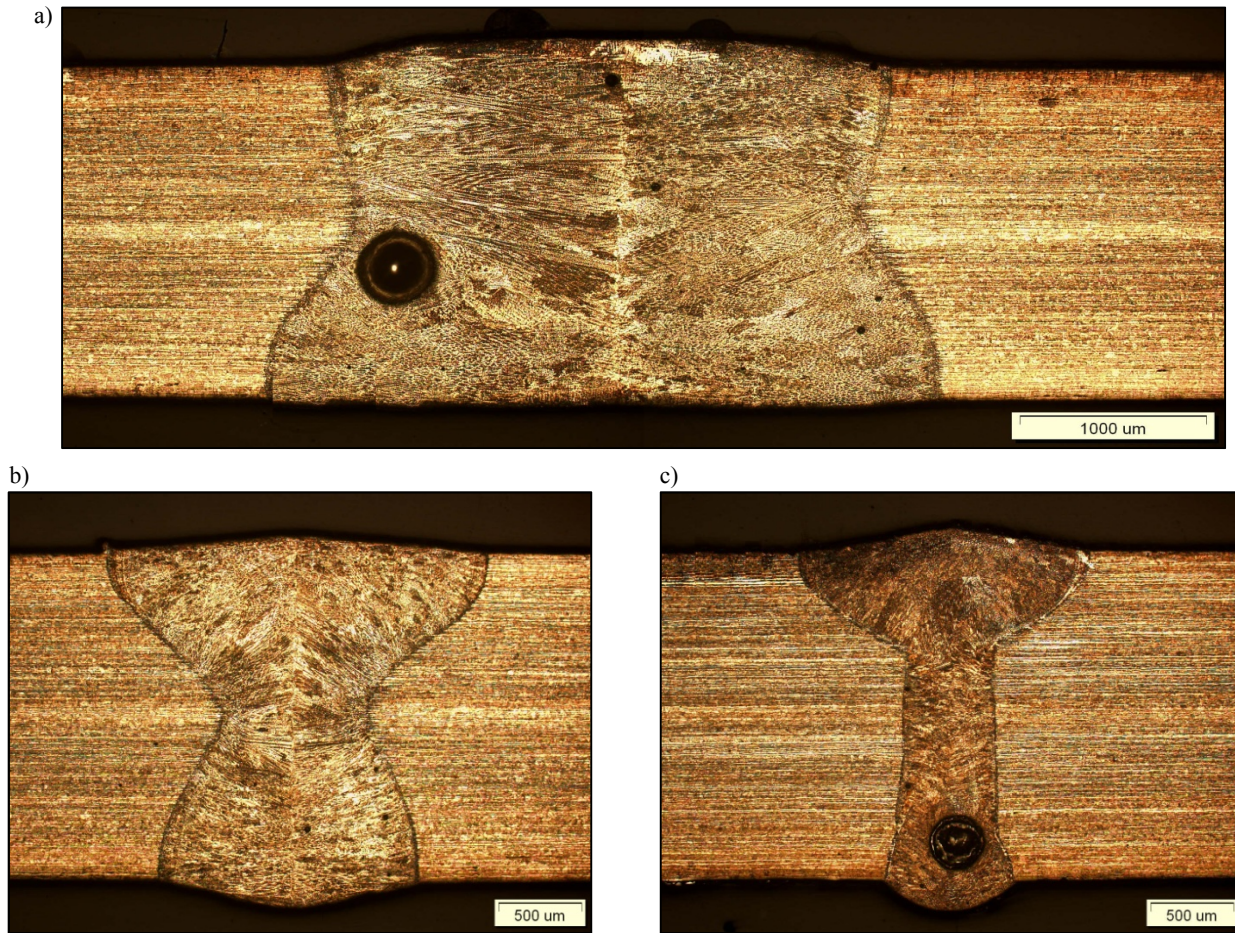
Macrostructure on cross sections of the simulated welds produced on AISI 304 steel sheets 2.0 mm thick by bead-on-plate laser welding at 1.0 kW of output power and different welding speed (Table 3); a) 0.5 m/min, b) 1.0 m/min, c) 1.5 m/min
